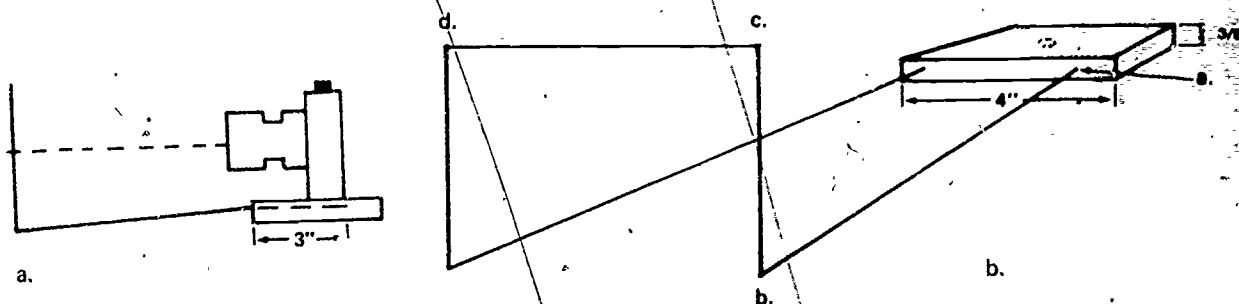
Design of close-frame for 35 mm rangefinder camera. a. side view b. front view. See table for dimensions for different lenses.
